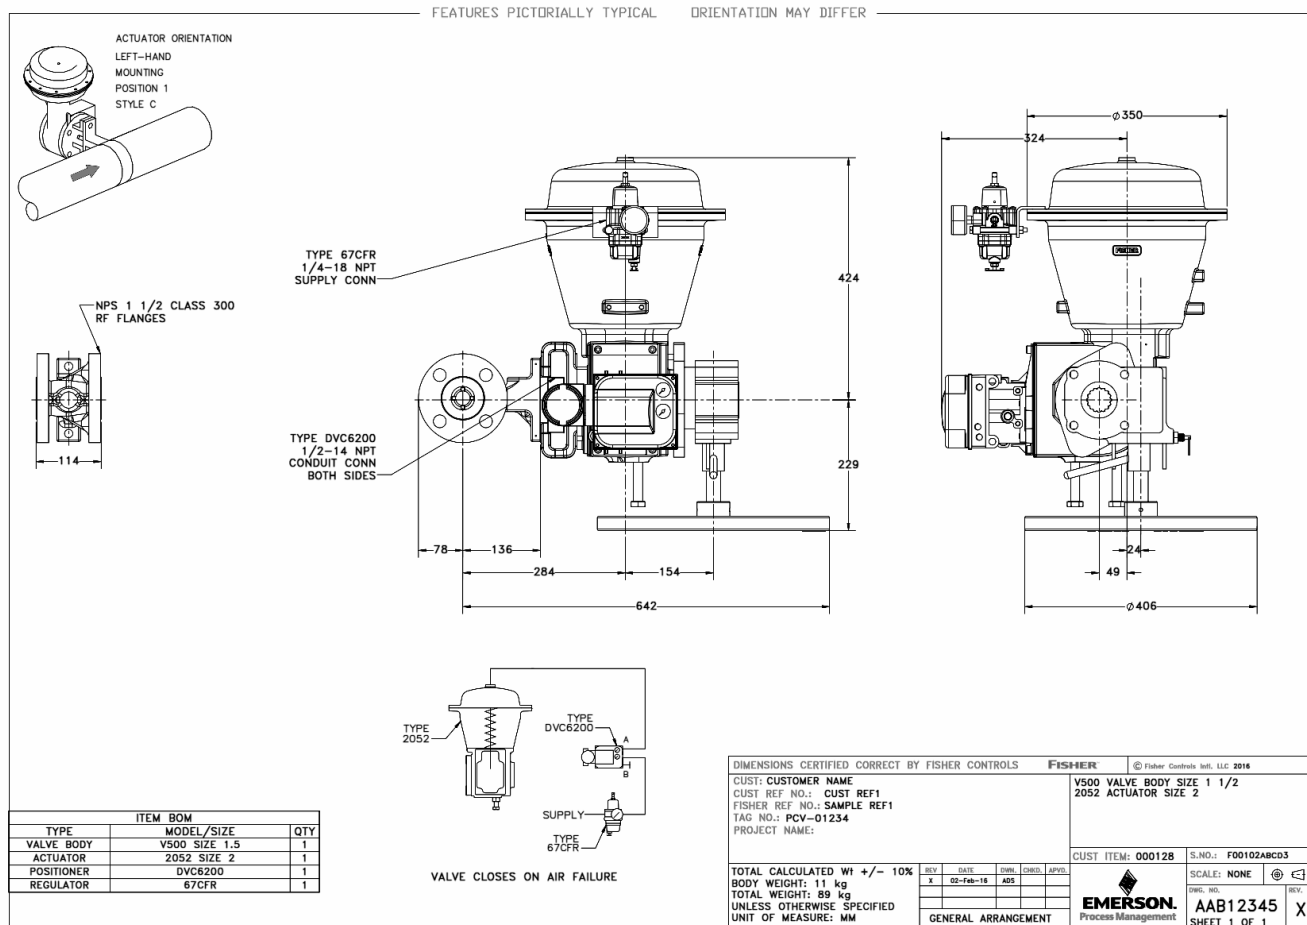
LEVEL 3 Drawing - Rotary (Sheets 1 and 2)
